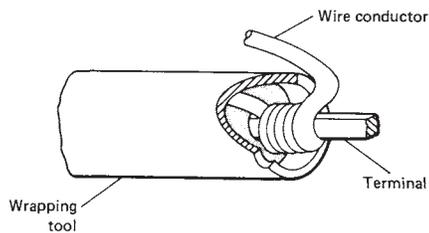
Typical solderless wrapped connection. Wrapping tool is removed after connection is made.
